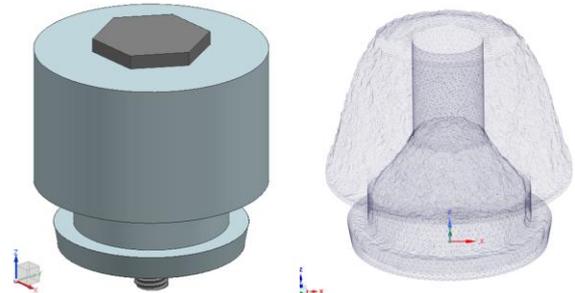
The mounting rubber with modified assembly method(left), Shape of proposed mounting rubber suggested by the second topology optimization(right)
